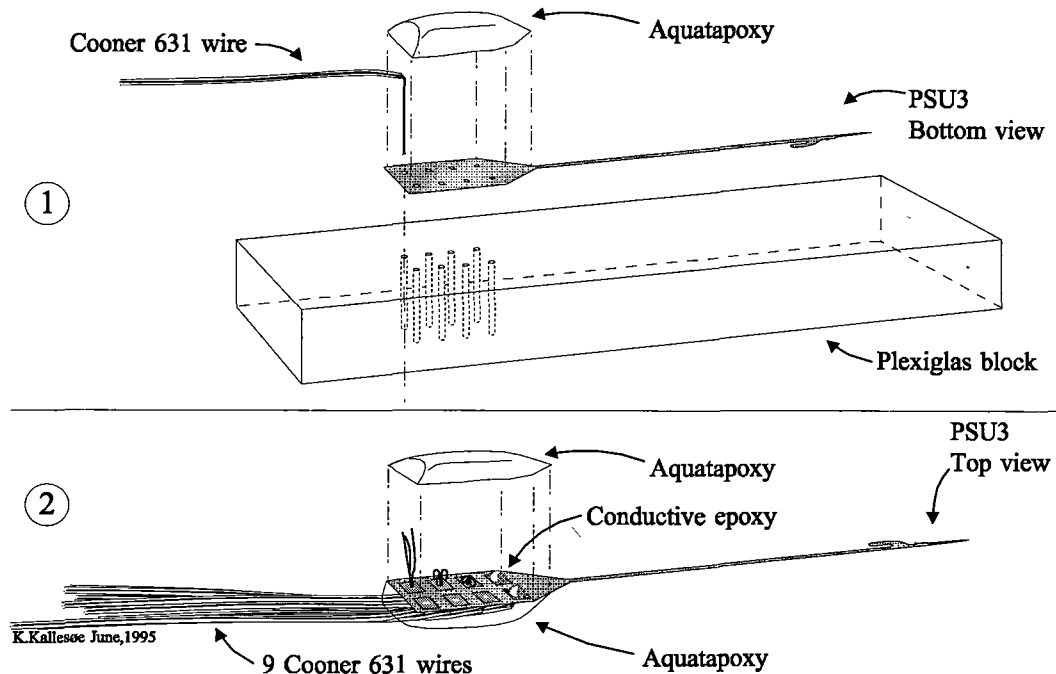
The assembly technique of PSU-3-4-5-6 designs. (1) The probe was initially positioned with the bottom plane facing up, on a block of Plexiglas with holes drilled 1mm apart to match the hole pattern in the bonding platform. The deinsulated end of each 631 Cooner wire was passed through the probe and Plexiglas holes. The end of the wire was bent on the bottom side of the Plexiglas to prevent the wire from slipping back out. A thin encapsulation of Aquatapoxy was used to fix the location of all 8 wires. A ninth wire was embedded in the Aquatapoxy to detect any leakage in this area. (2) A piece of adhesive tape attached to the Plexiglas prior to the first step of the assembly, allowed the probe to be lifted from the Plexiglas. Any excess Aquatapoxy that otherwise would have fixed the probe to the Plexiglas, was easily removed from the tape. The assembly was flipped over and the bare Cooner wire strands were trimmed down to approximately 1mm. These ends were spread out on the gold bonding pad sites and conductive epoxy was used to connect all strands to the gold. All connections were embedded in Aquatapoxy.
